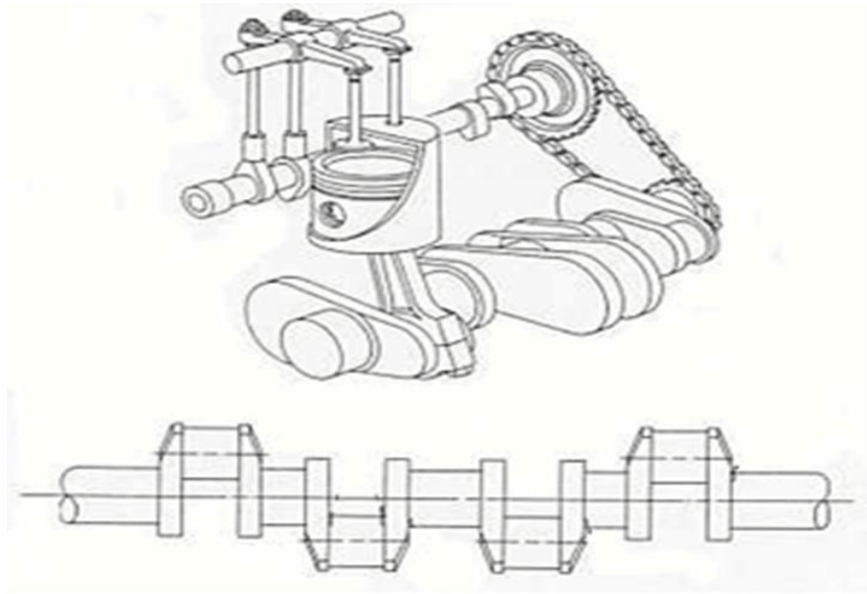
Fatigue cracks in crankshaft
